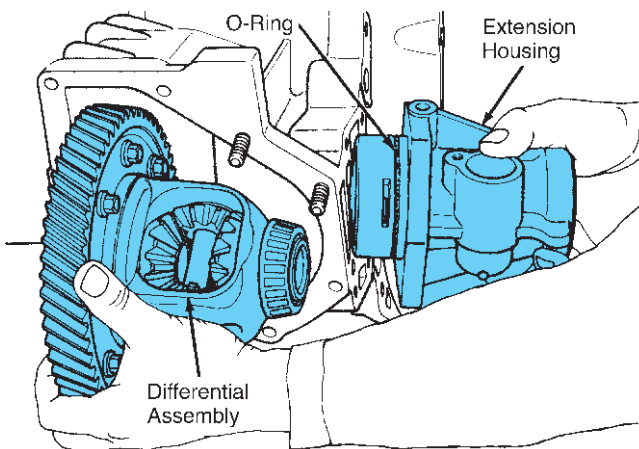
Disassembly of this Chrysler transaxle begins with the removal of the differential cover, extension housing, and differential assembly. (Courtesy of DaimlerChrysler Corporation)
